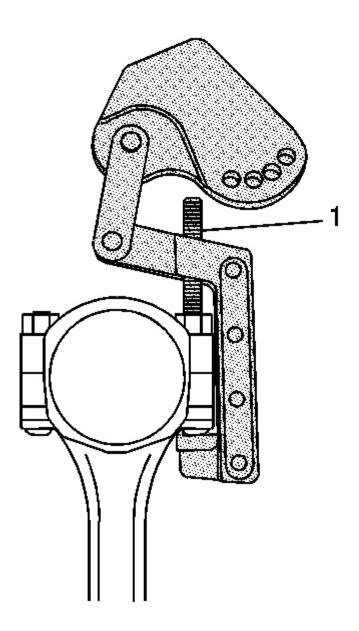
Positioning Screw Onto Small End Of Connecting Rod Bolt Courtesy of GENERAL MOTORS CORP.
